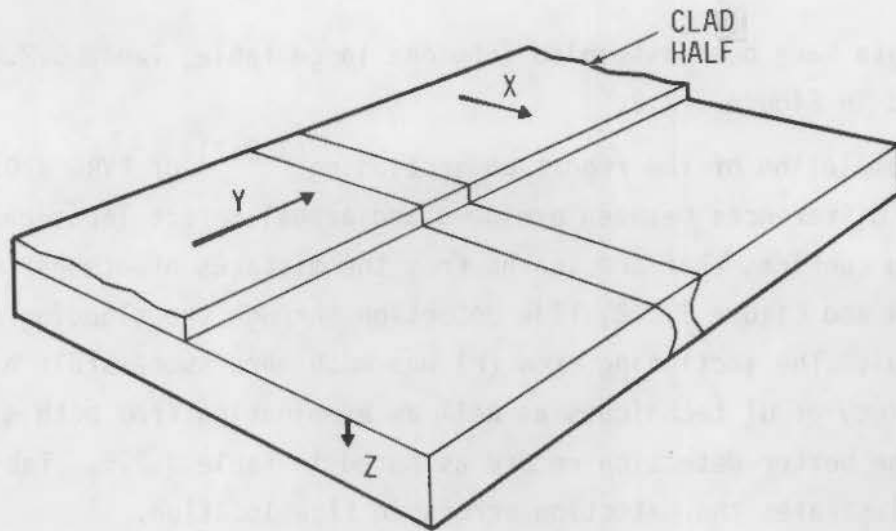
PVRC Plate-Weld Specimen 201
